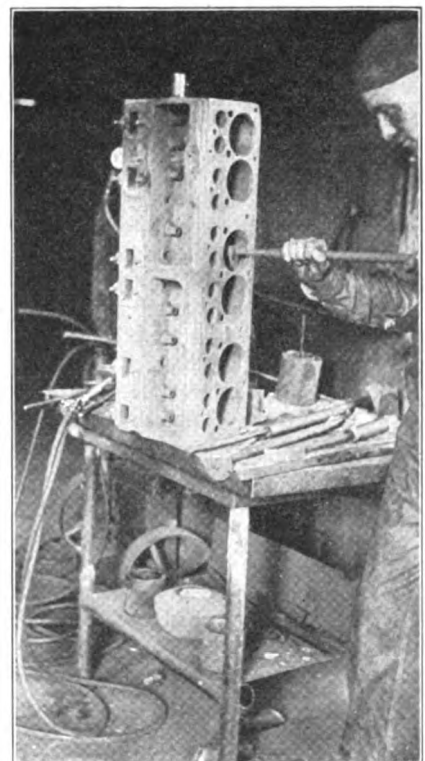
REMOVING THE SURPLUS FILLING SOLDER WITH A SPECIAL SCRAPER
